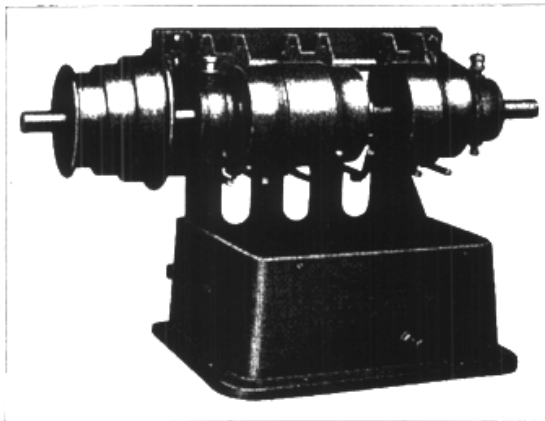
Horizontal Safety Drive Countershaft ball-bearing, cover removed (Patented, June 19, 1929)
